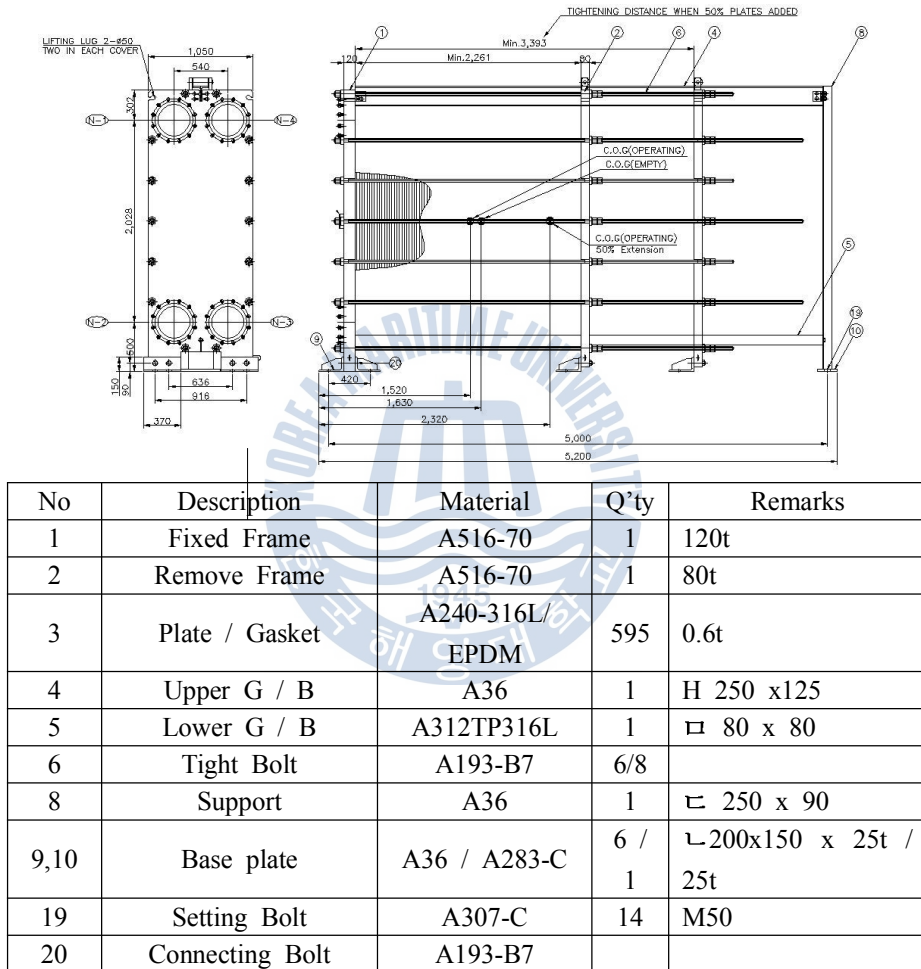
Geometry of plate type heat exchanger (2D drawing)
